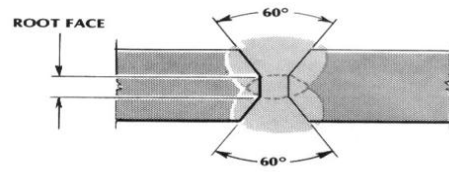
The double-V butt joint can be welded on both sides assuring complete penetration
